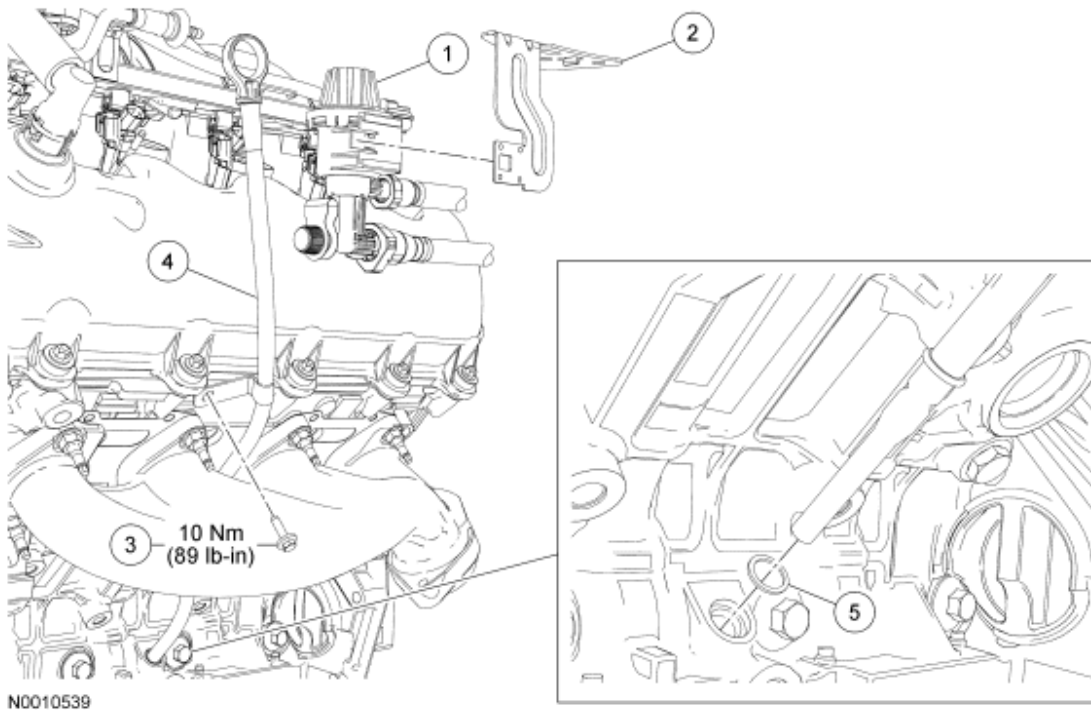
Identifying Oil Level Indicator & Tube With Torque Specification
